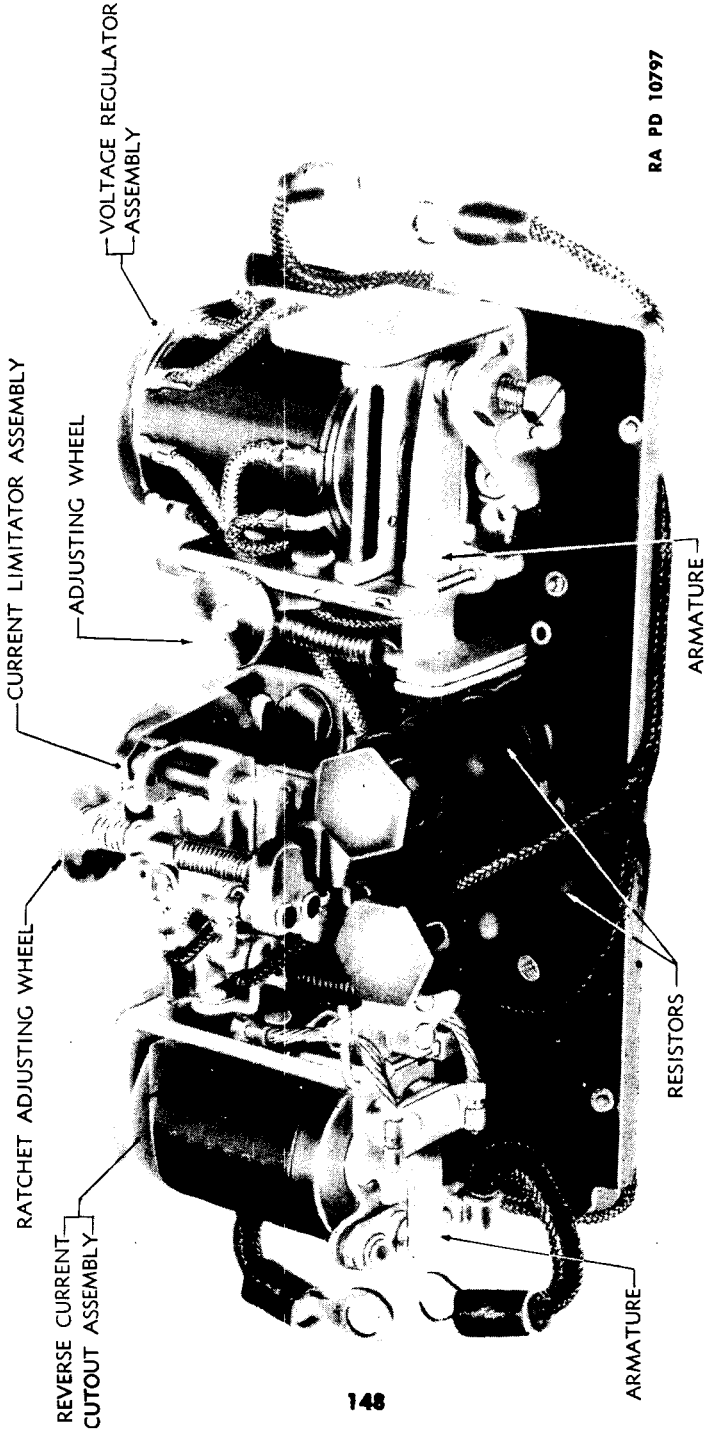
Partially Exploded View, Voltage Control — Eclipse Type 667-4-A
